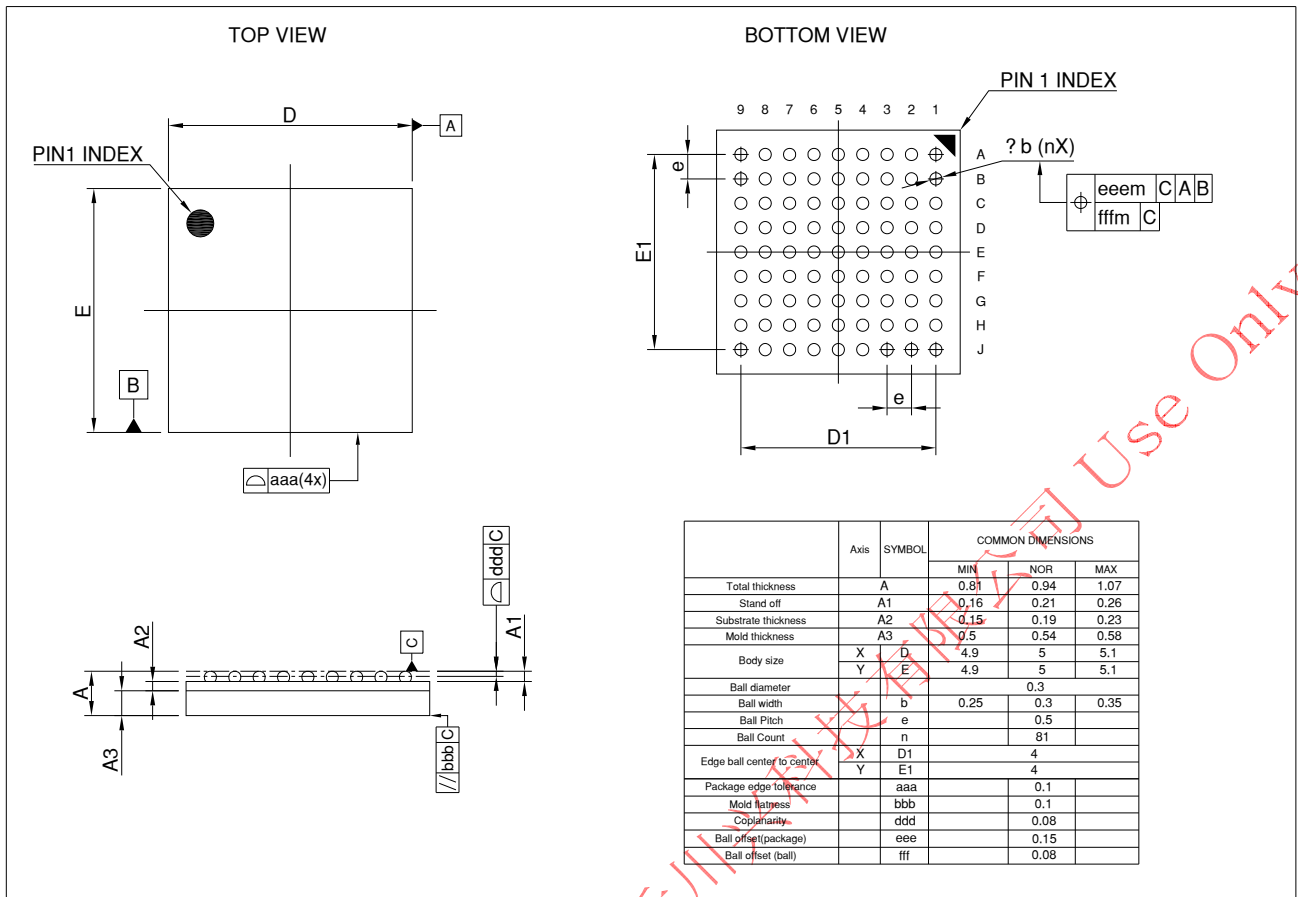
LT6711B BGA81 5mmx5mm Package
